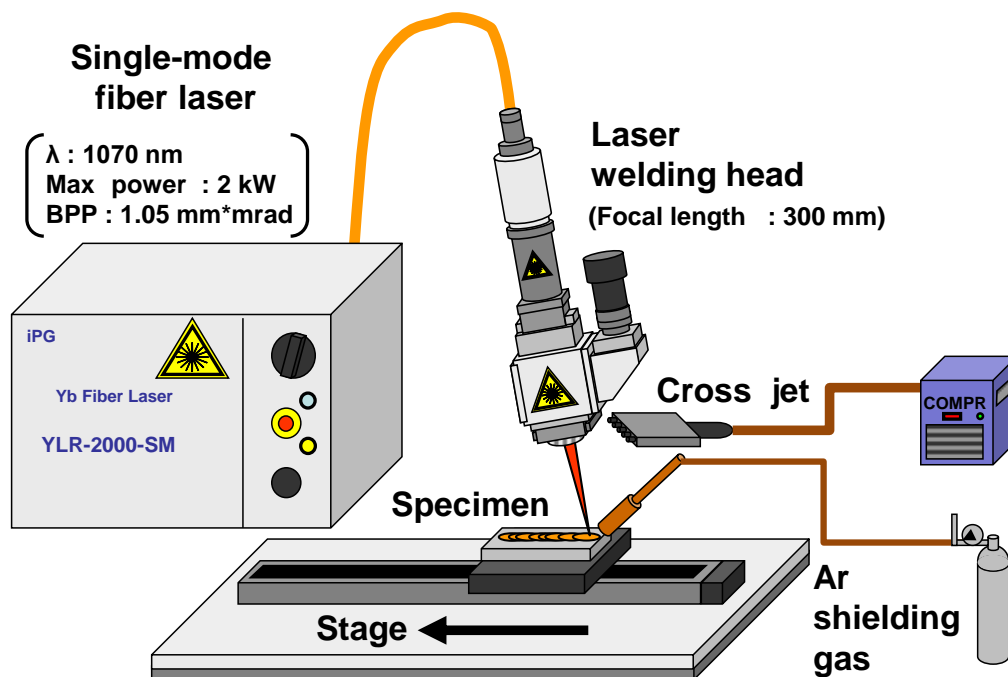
Schematic experimental set-up for 2 kW single-mode (SM) fiber laser welding of Ti and Al dissimilar metals.
